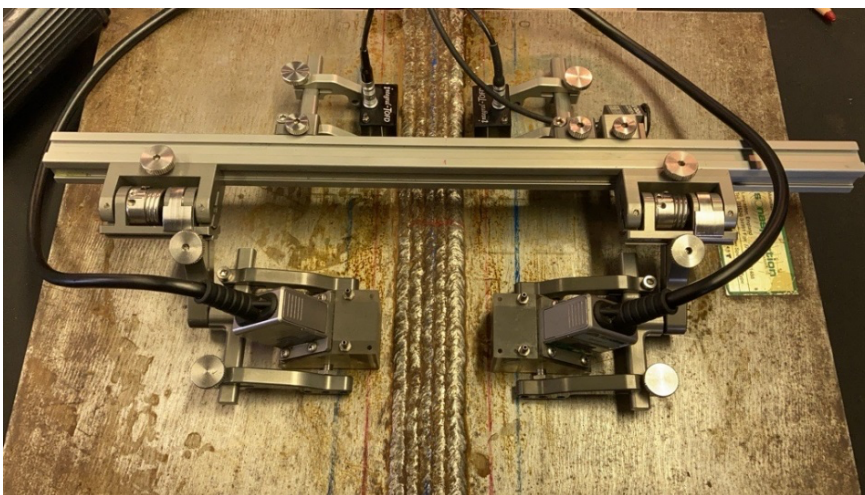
TOFD setup on a Butt weld sample in a multi-group setup with PA (Phased Array)
